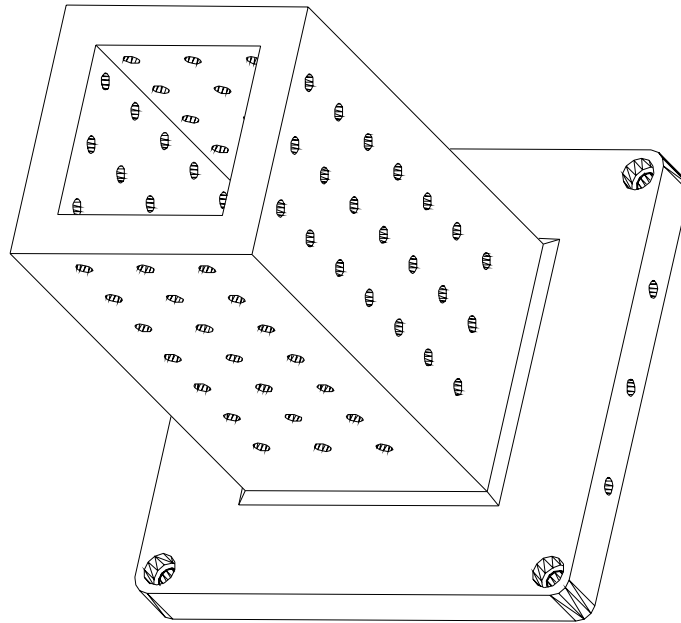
A tombstone for mounting multiple components on different faces.
